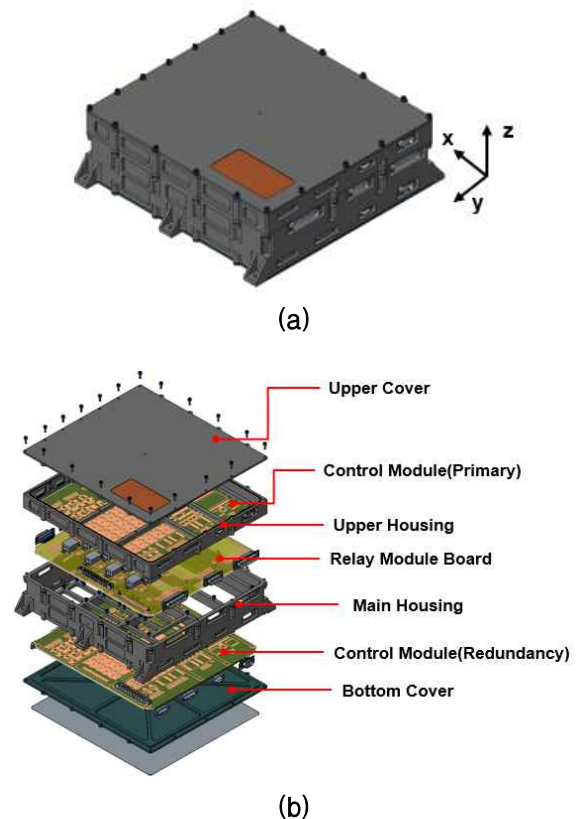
CCB Configuration [(a) Isometric View, (b) Exploded View]
